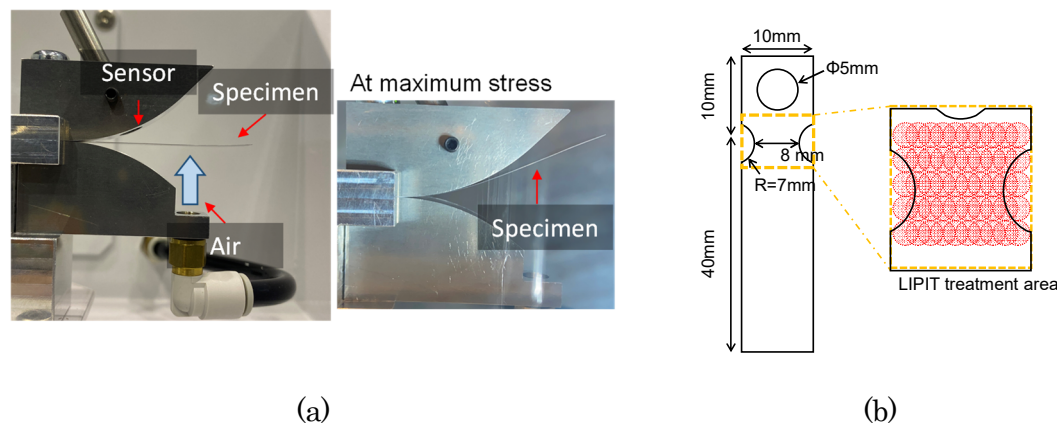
(a) Bending fatigue test machine, (b) Shape and dimension of bending fatigue test specimens (The red circle indicates a single shot of LIPIT)
